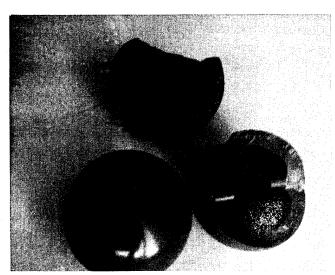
Hollow spheres, molded using polyvinylidene fluoride for critical chemical service check valve. View shows assembled ball and broken section exemplifies unusually strong joint formed by merely heating surfaces to be joined to a depth of approximately 1/32" before clamping together.
